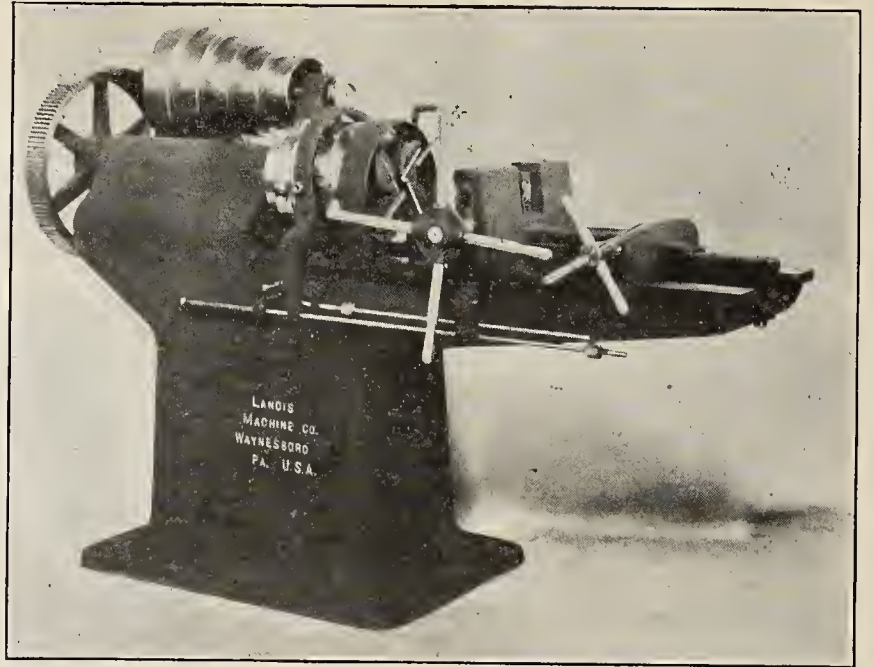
2-INCH SINGLE HEAD LANDIS BOLT CUTTER.
